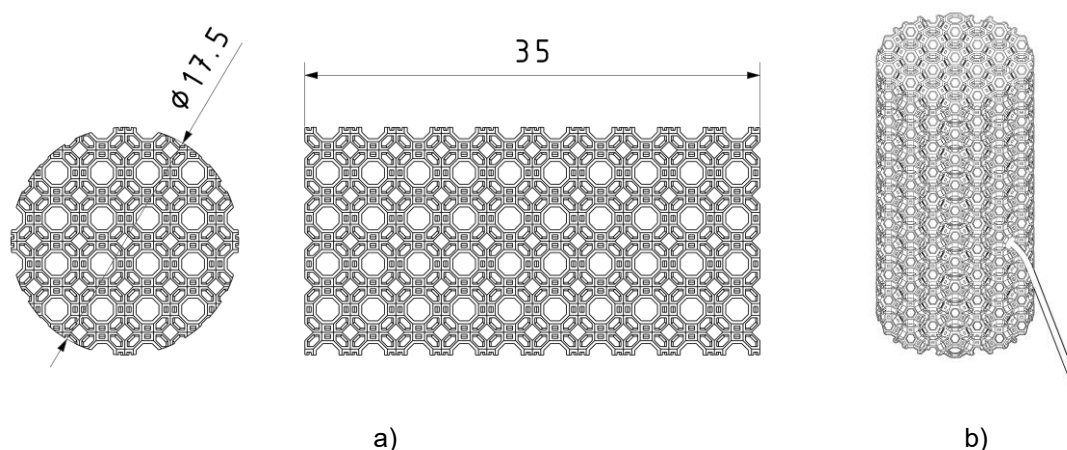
Scaffold a) technical drawing; b) isometric view with electric contact.
